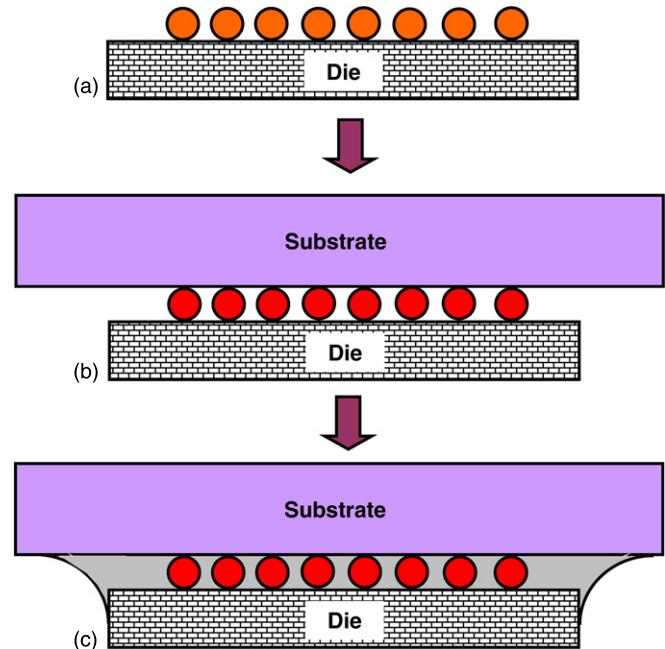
Flip-chip packaging: (a) solder bumping, (b) solder reflow and (c) underfilling and thermal cycling.
